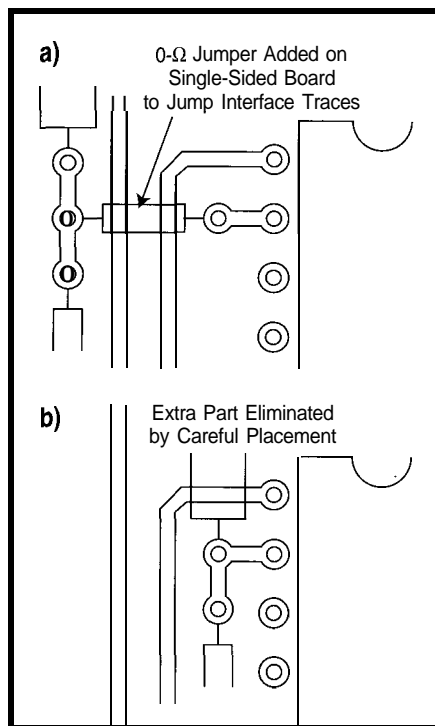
Single-sided boards need additional thought to eliminate unwanted components.
